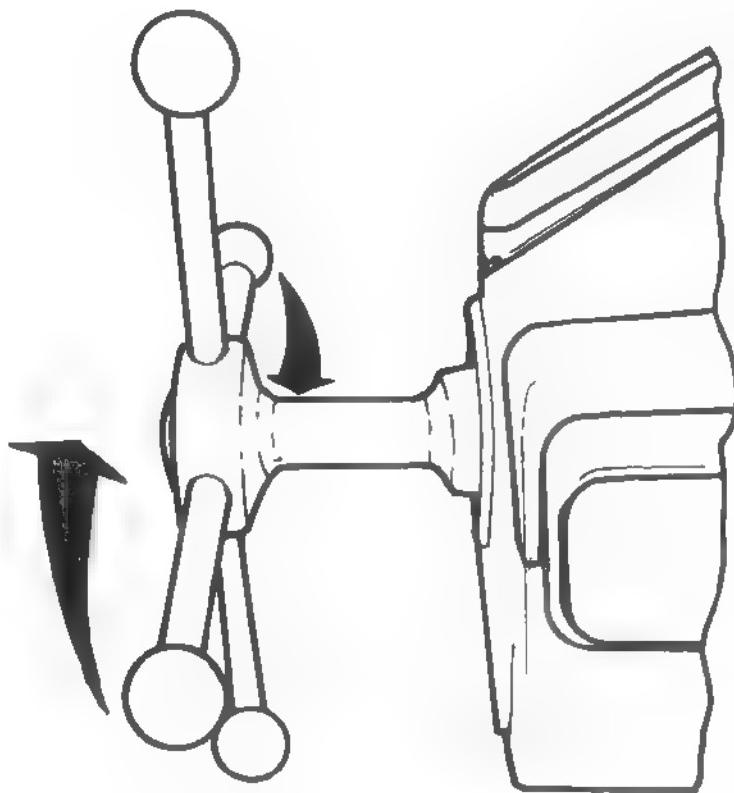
TURNING ROUND CRANKSHAFT BY MEANS OF D-18 DEVICE.
